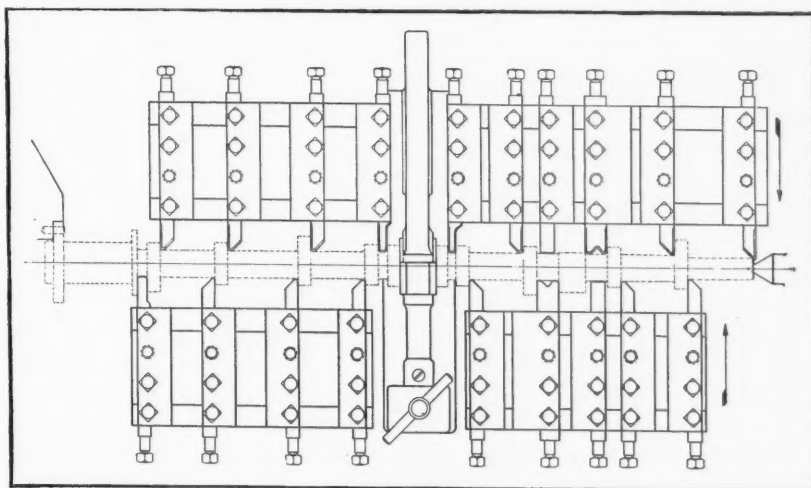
Tooling provided on a Fay Automatic Lathe for squaring the Shoulders of Camshafts
